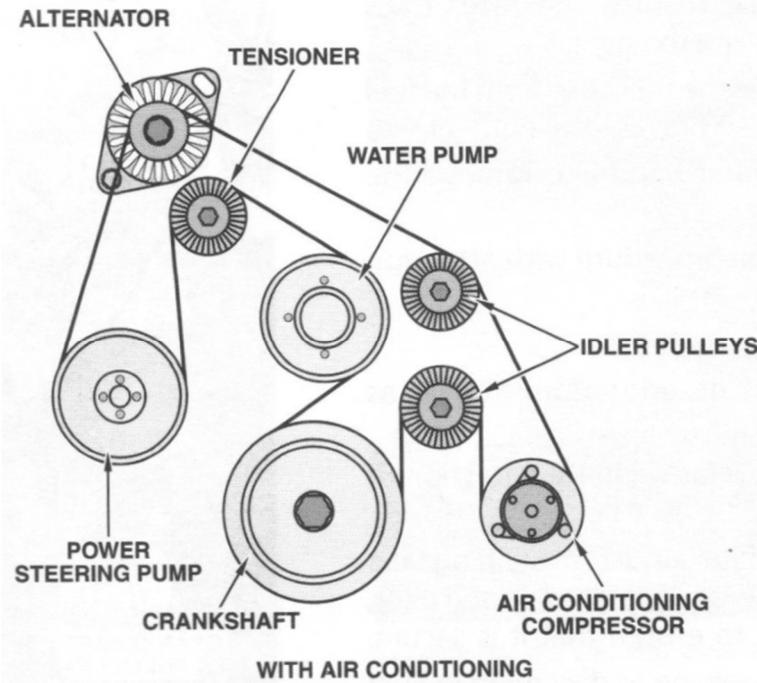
Diagram of a Buick V6 3800 engine's belt drive system [7].
